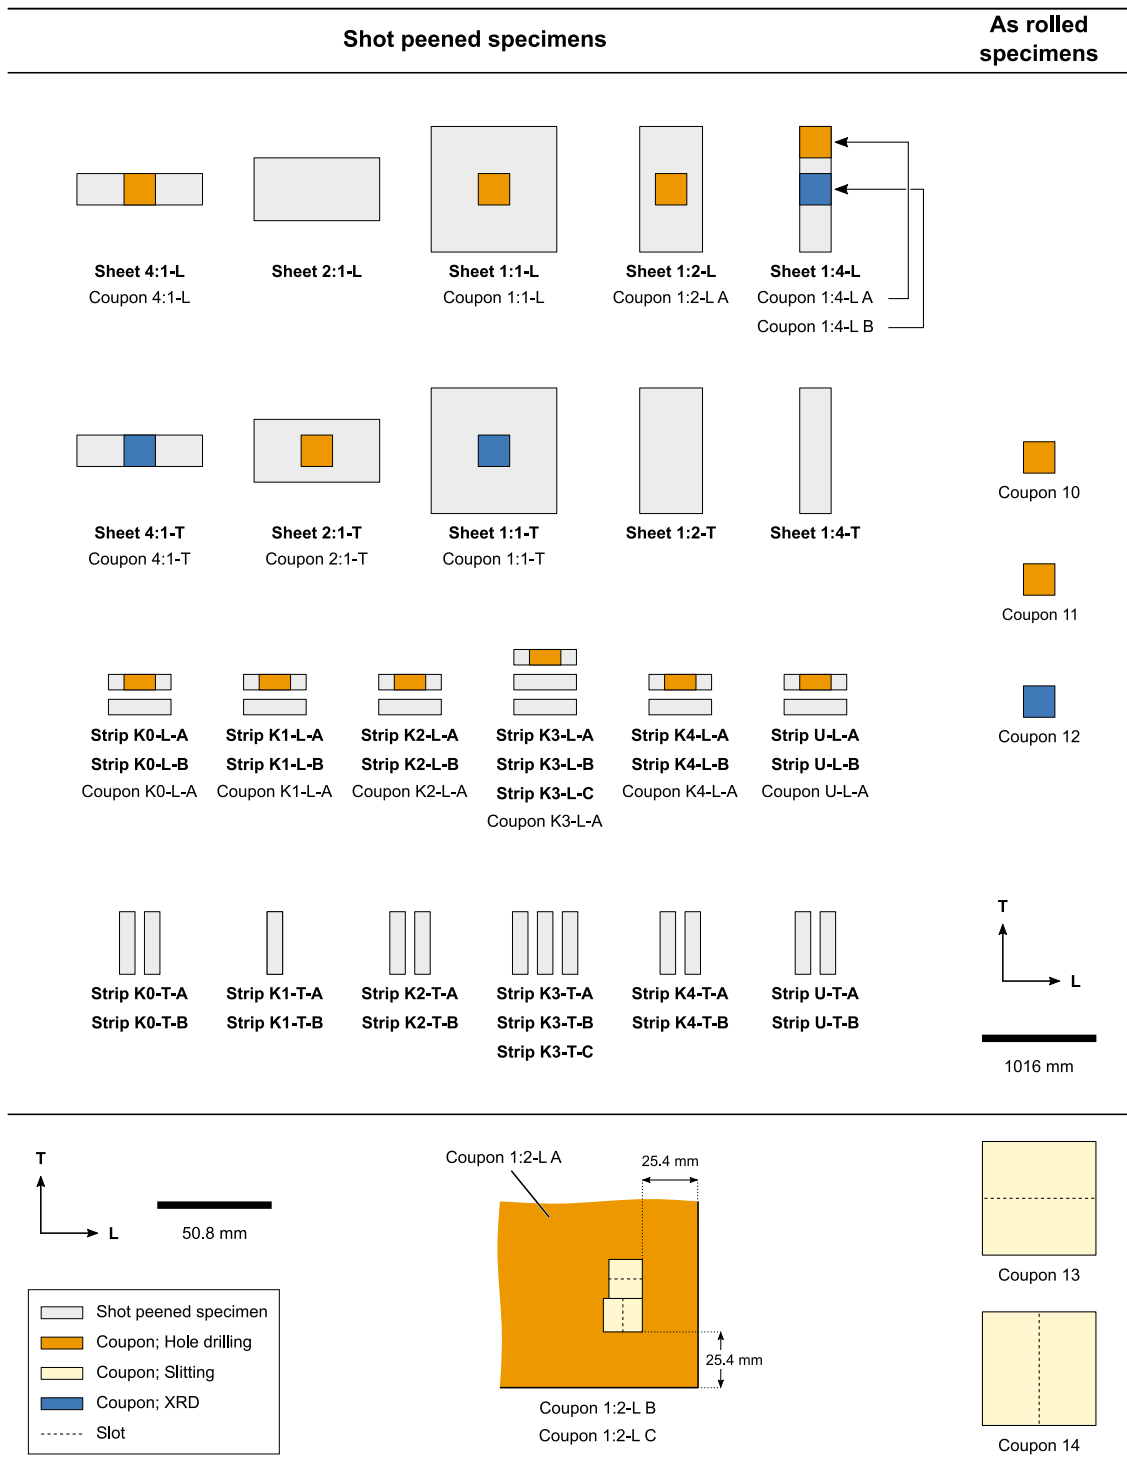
Cutting plan for specimens used for peen forming tests and residual stress measurements.
